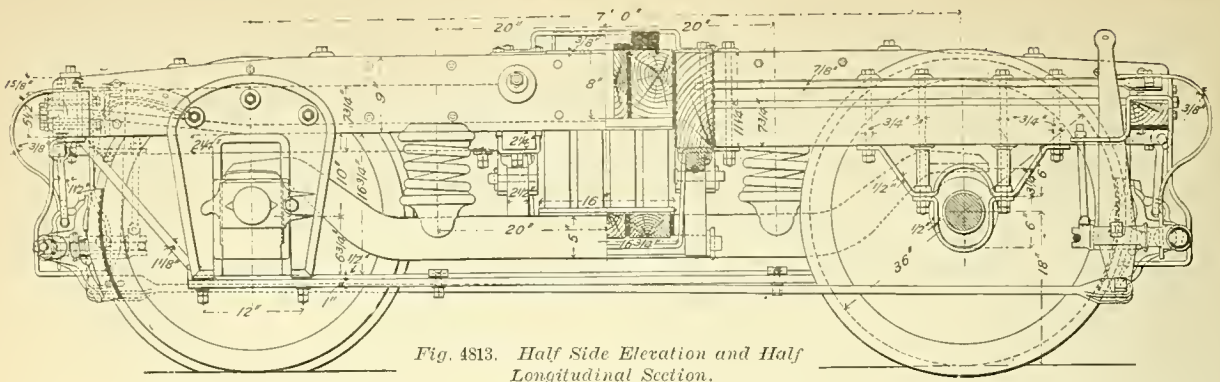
Half Side Elevation and Half Longitudinal Section.
